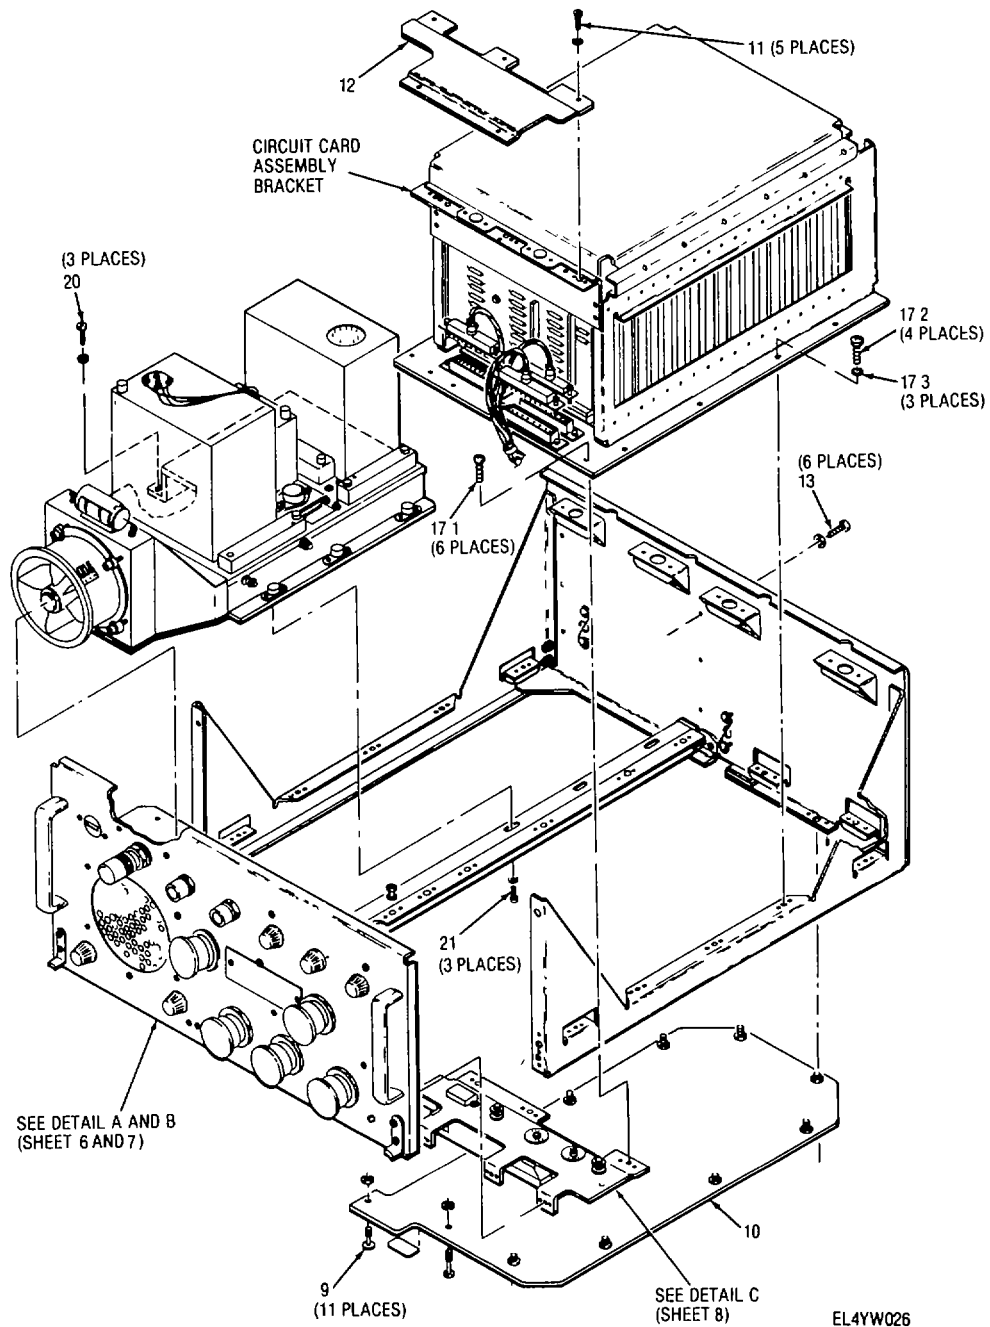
Encoder exploded view (sheet 2 of 8).
